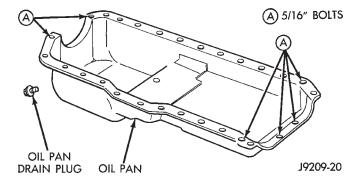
Position of 5/16 inch Oil Pan Bolts
